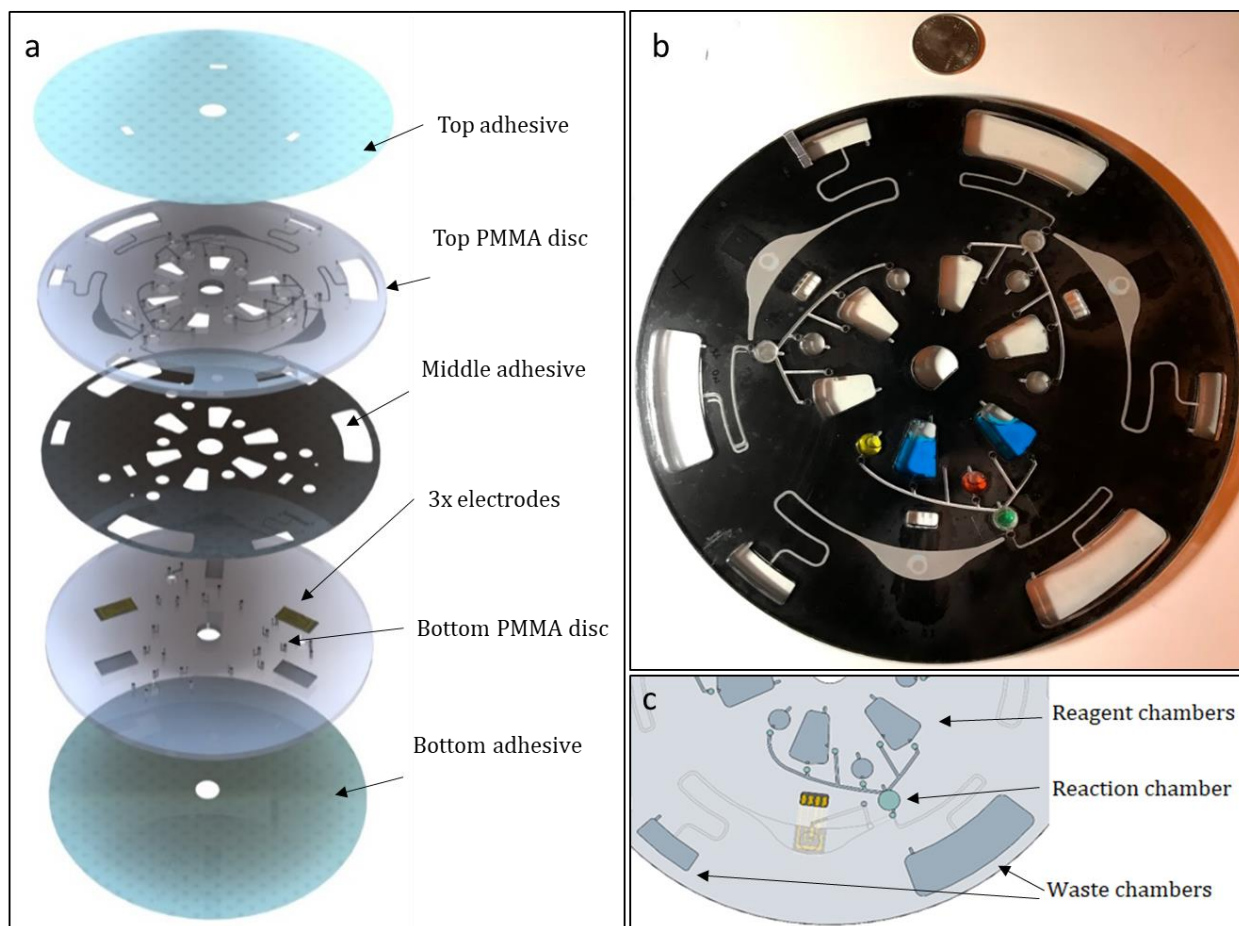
a) Disc assembly with black adhesive layer to enable use of laser valves, b) assembled disc with dyed water in reagent chambers (green is reaction chamber with break apart, pre-coated detection well), c) model of disc layout.
